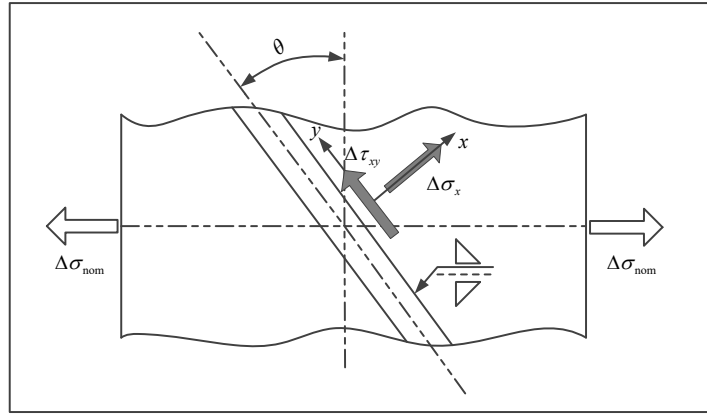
Inclined Fillet Weld subjected to Uniaxial Fatigue Loading
